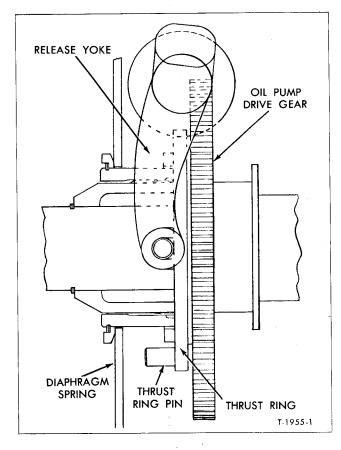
Operating Position of Clutch Release Shaft Yoke and Thrust Ring Pin
